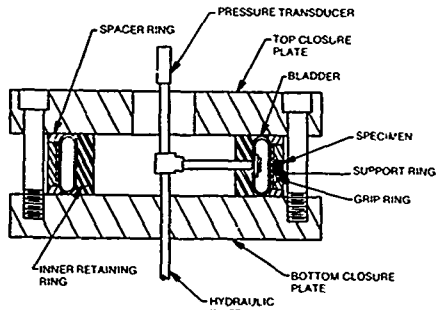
Hydrostatic Set-up For Tension Testing of Ring Specimens
